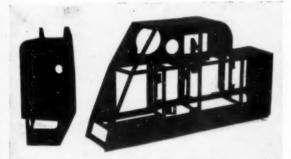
Assembly of De Havilland "Sea Venom" canopy castings in RZ5 alloy.
